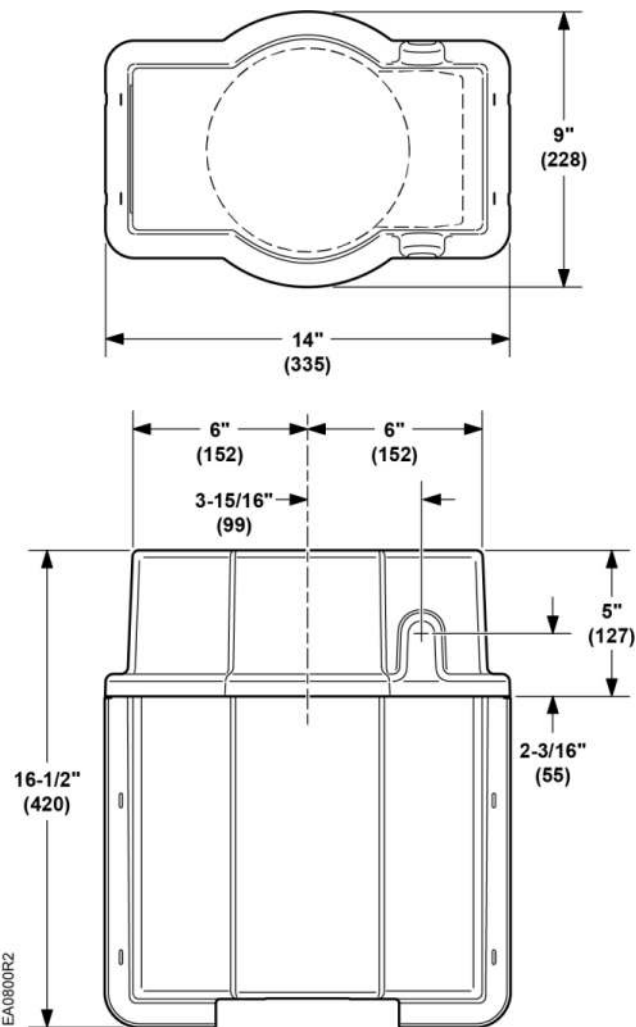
Dimensions of the 599-10065 Weather Shield in Inches (Millimeters).
